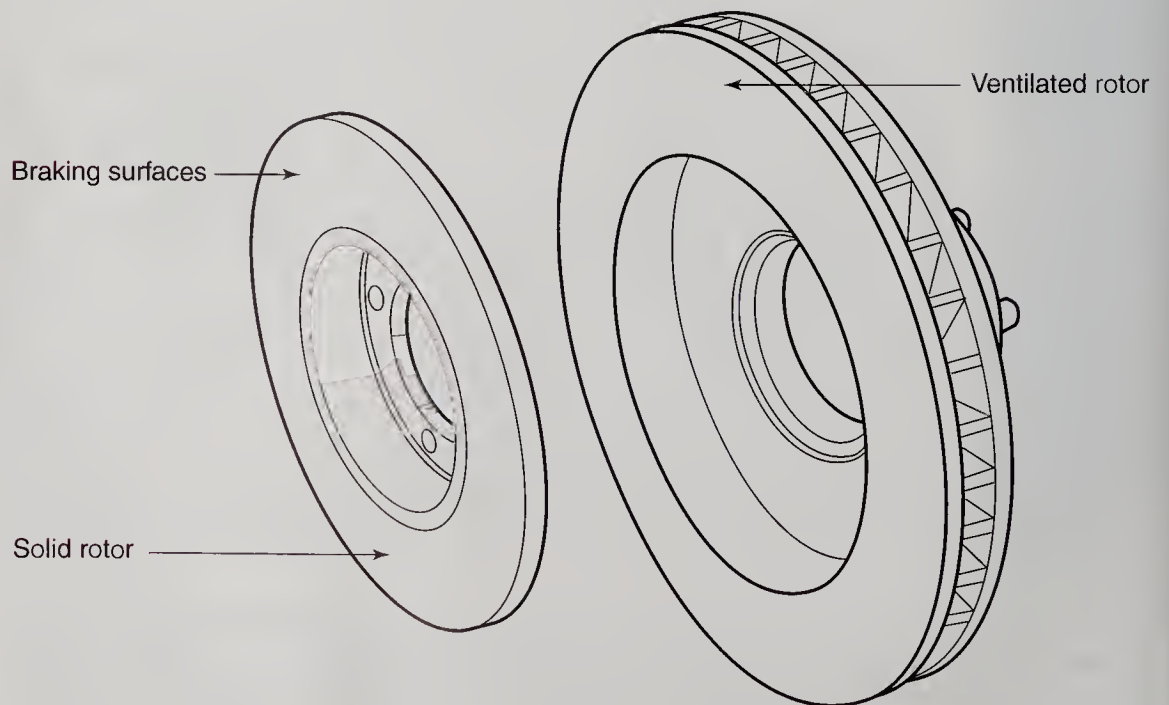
A solid rotor, left, and a large ventilated rotor, right.
